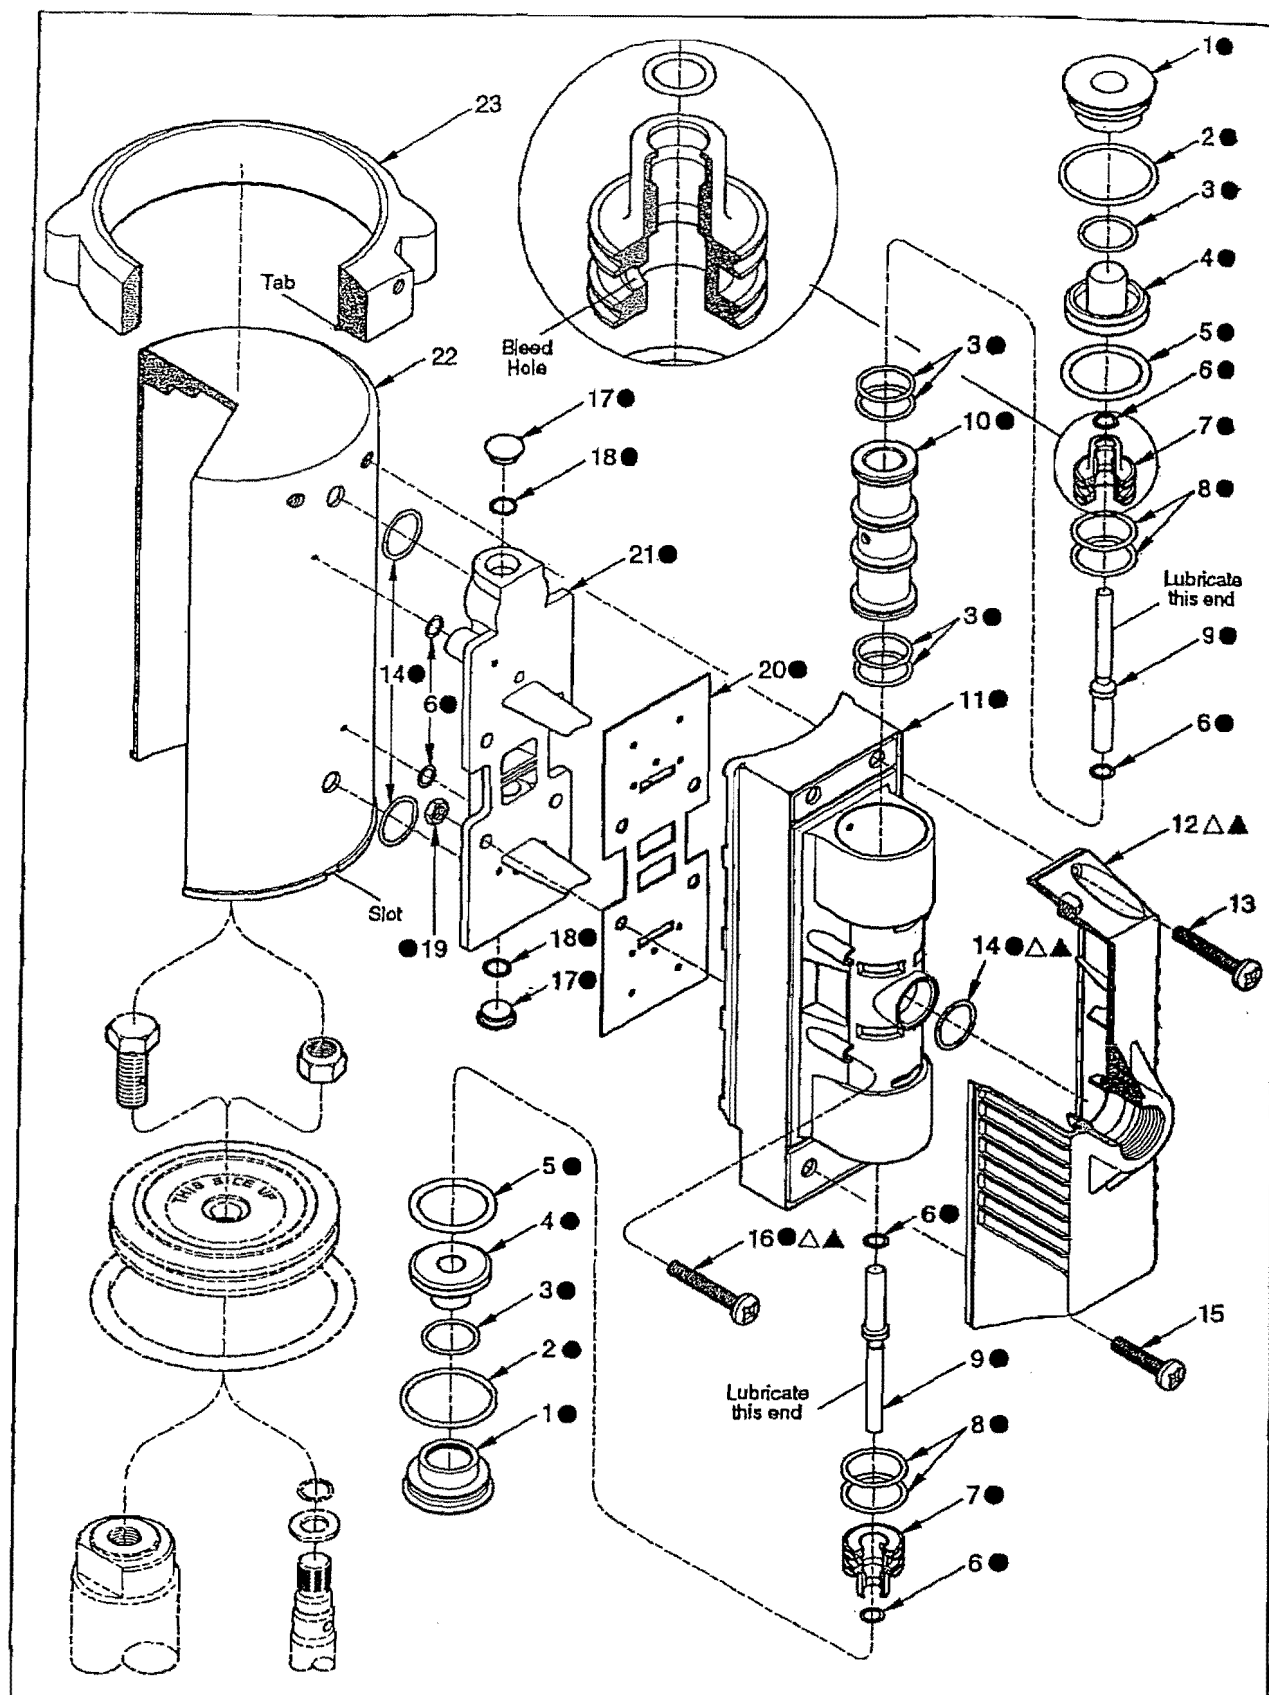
Air Motor Model 338066 Series - Exploded View
